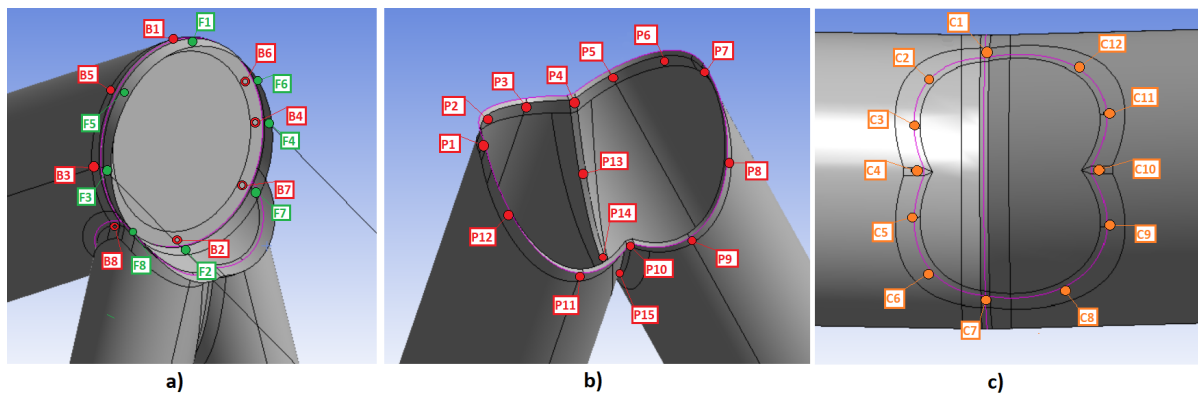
Fatigue damage measurement location setup for crane upper arm joint
